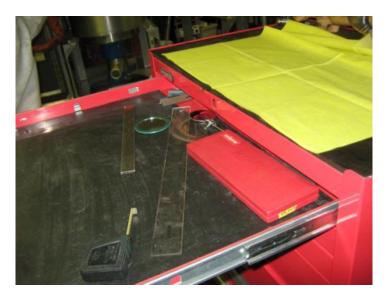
Top Drawer of FP-04 Tool Box
